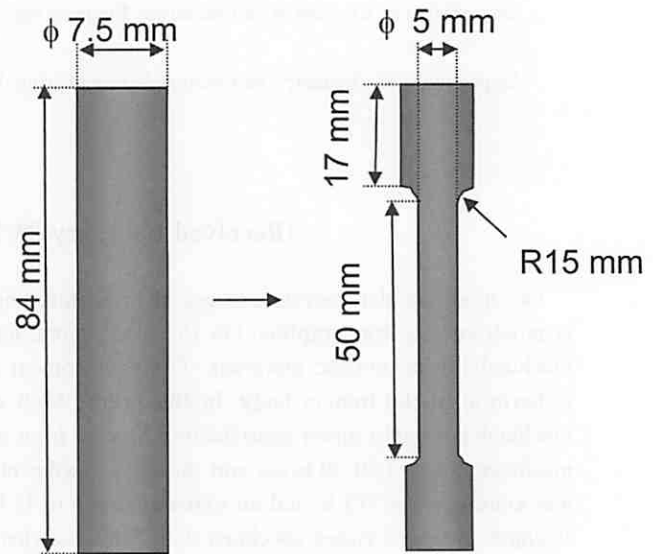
Schematic illustration of extruded specimen for tensile test.
